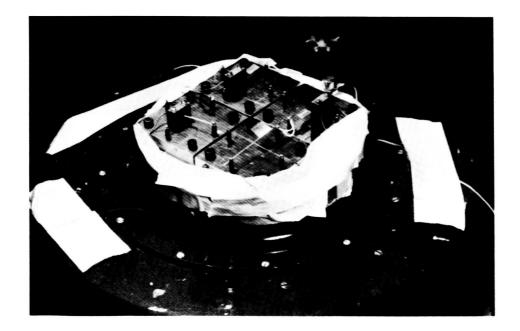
Weld joint and solder joint specimens mounted on vibration table in preparation for the electrical tests during vibration (R105473).
